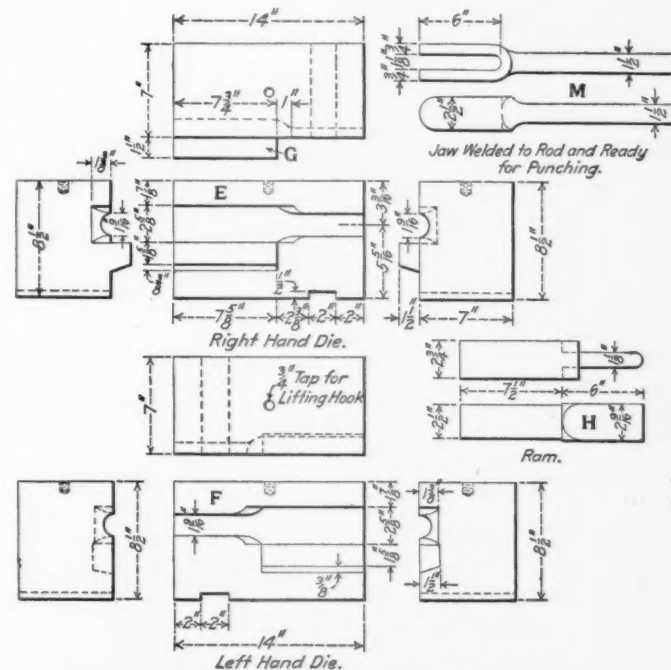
Dies for Welding Jaws to Brake Rods.
